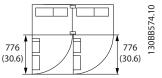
Space in front of IP21/IP54 enclosure type, frame size F10
